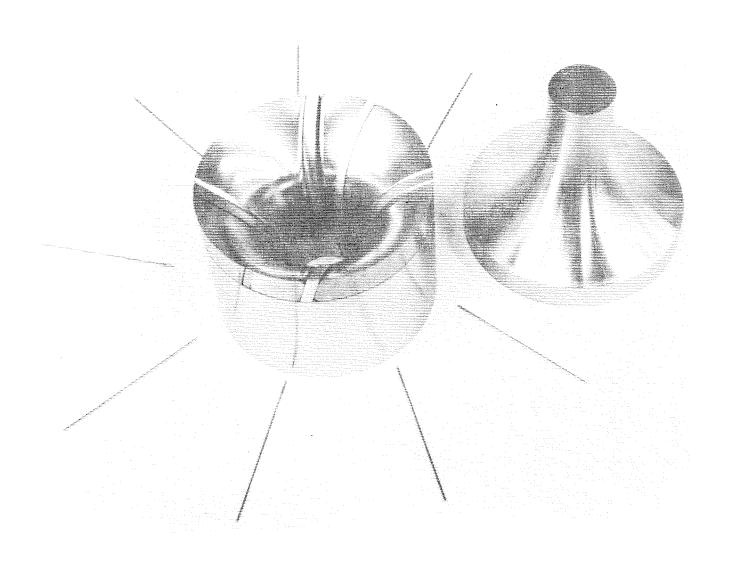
Final Simulated Impeller Sample Showing Partial Lay Up of Pre-Bond Assembly
